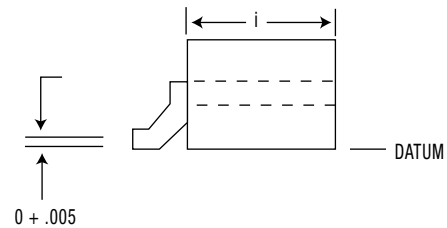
Surface Mount Tolerance for Components with Tabs
